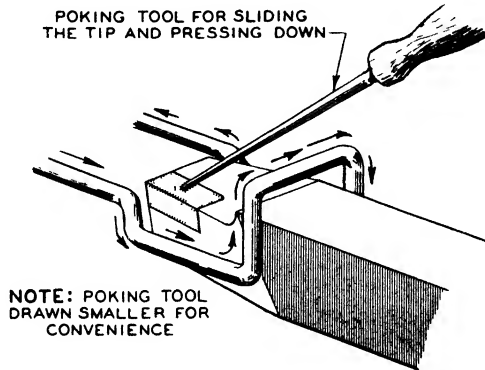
A Coil Designed for Optimum Heating in a Particular Brazing Job
